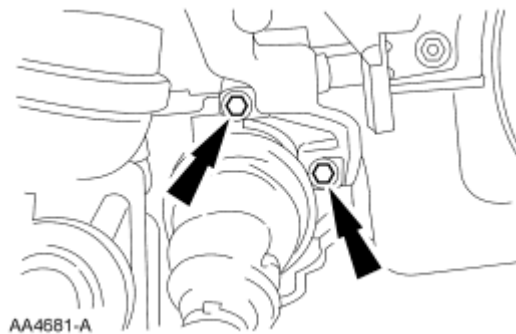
Engine Mount Bracket-To-Transaxle Bolts
